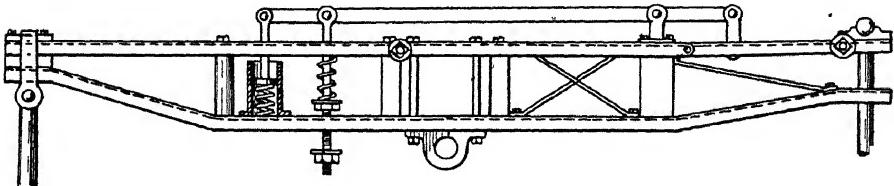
LONGTINE STRUCTURAL WALKING BEAM.
